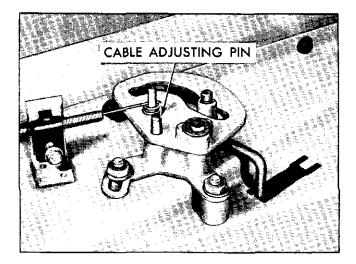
Temperature Control Cable Adjusting Pin in Position
